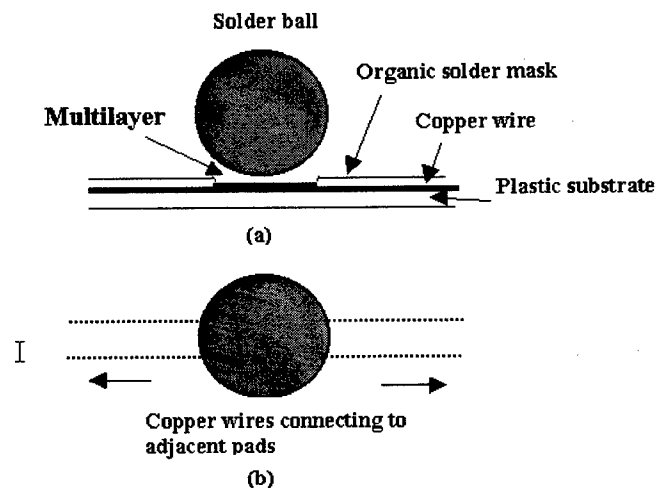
Layout of solder ball and PBGA substrate, (a) cross section, (b) top view
